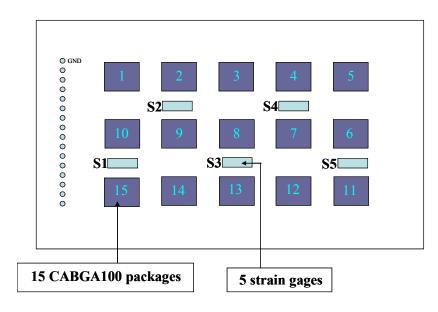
Location of Gages and Numbering Scheme of Packages on SAC305 Alloy Specimen Board on Test Board F
